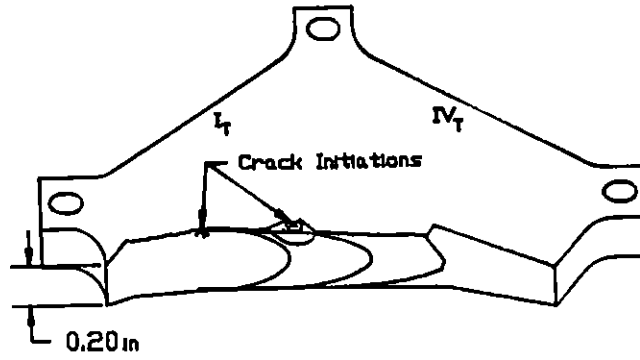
Fracture surface with initiations, plate specimen 3x2 in (7.6x5.0 cm)
